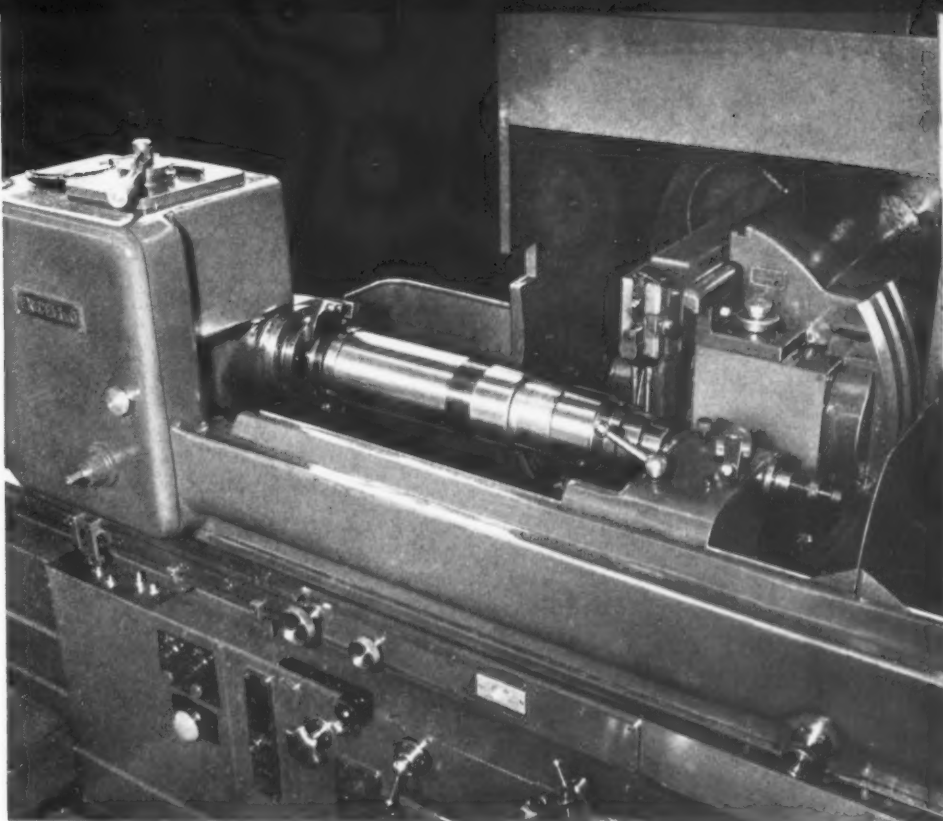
Gun Rotors are Finish-ground while Held on a Fixture that is Supported on Headstock and Tailstock Centers
